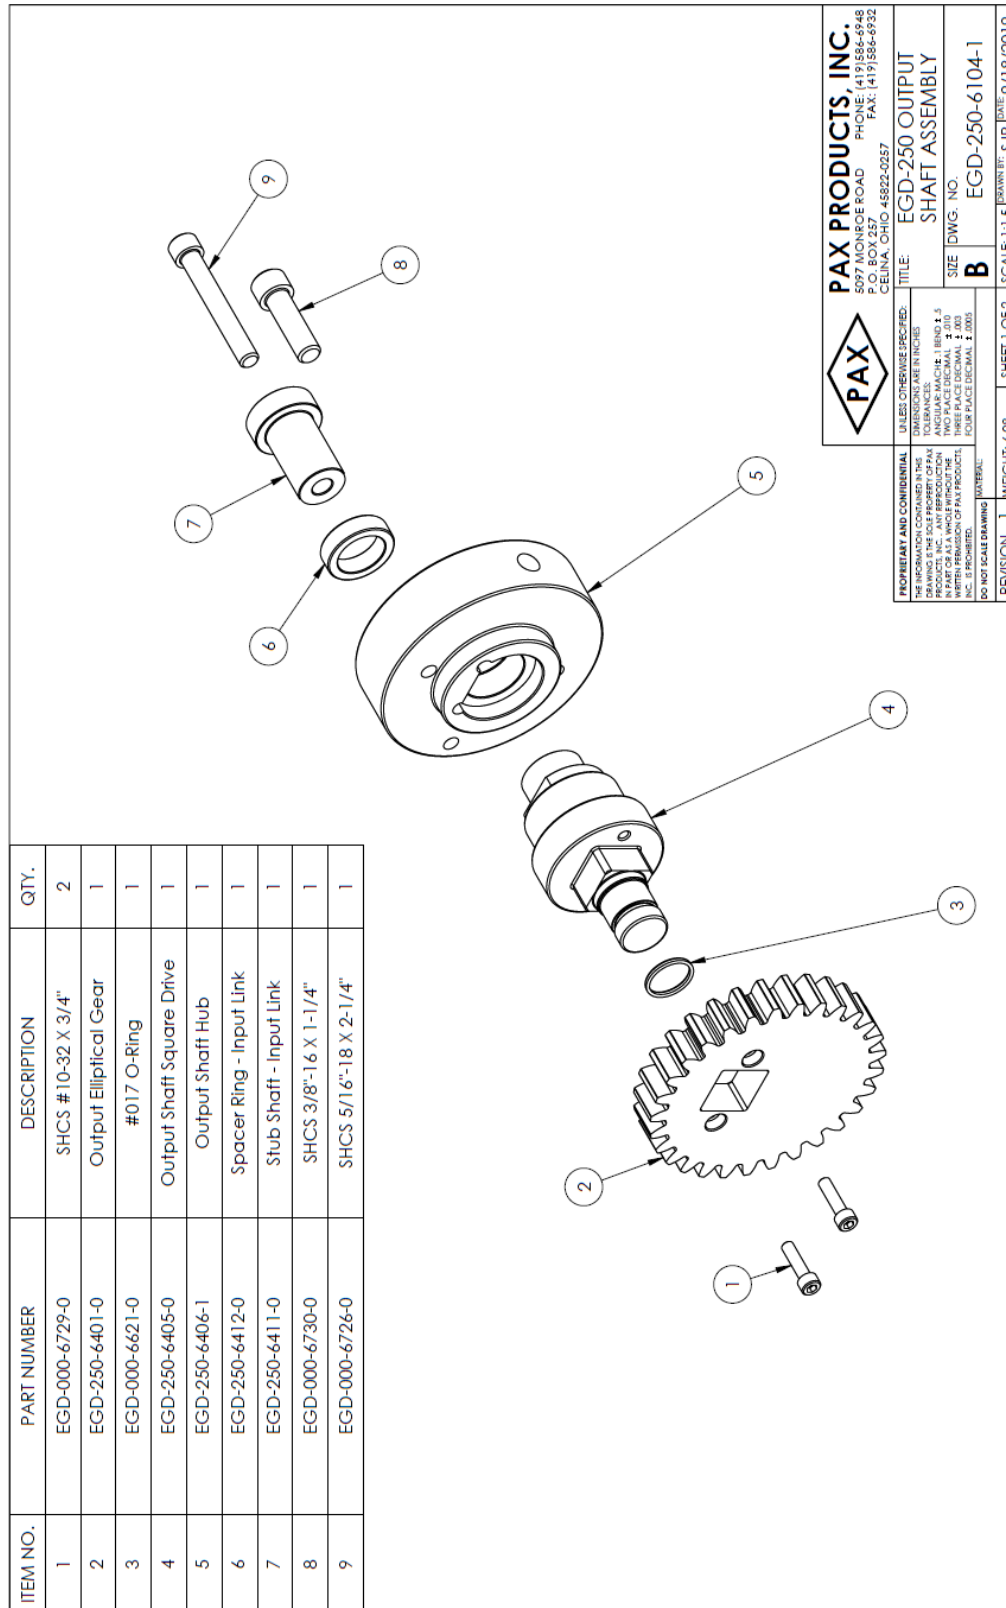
EGD-250 OUTPUT SHAFT ASSEMBLY
